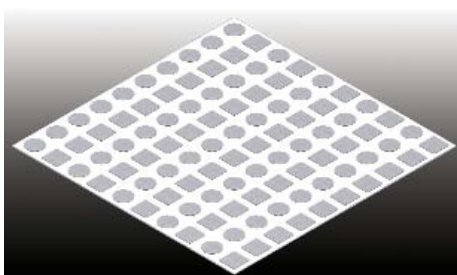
Final parts on a carrier material made by "kiss cutting"
